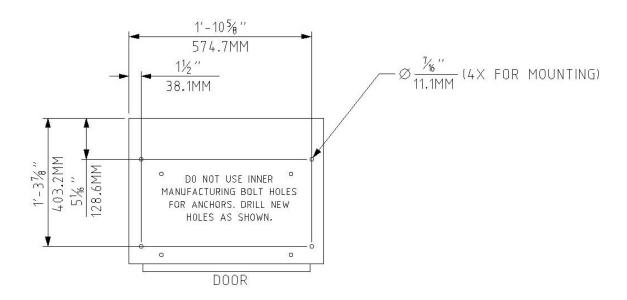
Mounting Hole Locations 2 Cylinder Cabinet or 2 Cylinder Euro Cabinet
